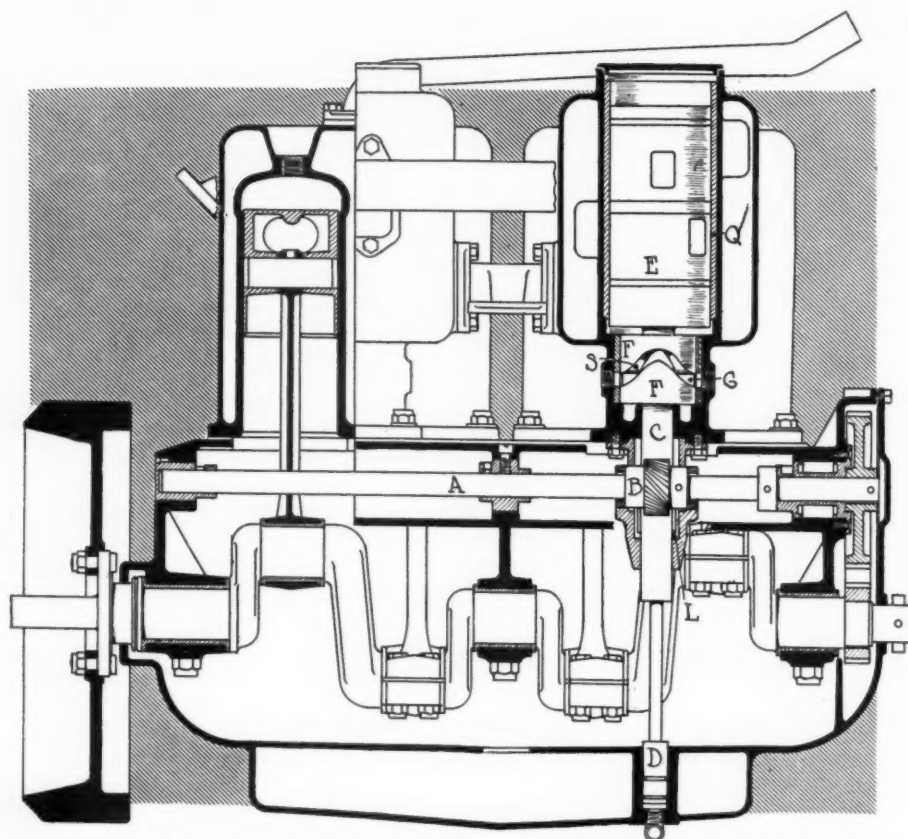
Longitudinal section through valve action and cylinders of Doherty piston valve engine
